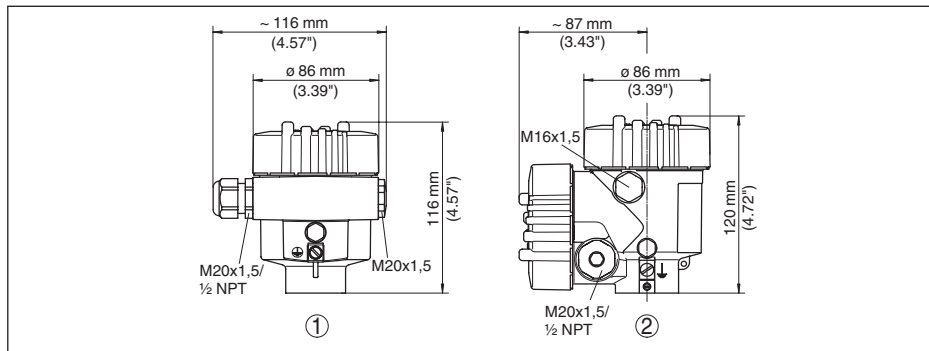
Housing versions in protection IP 66/IP 68 (0.2 bar) - with integrated display and adjustment module the housing is 9 mm/0.35 in higher
